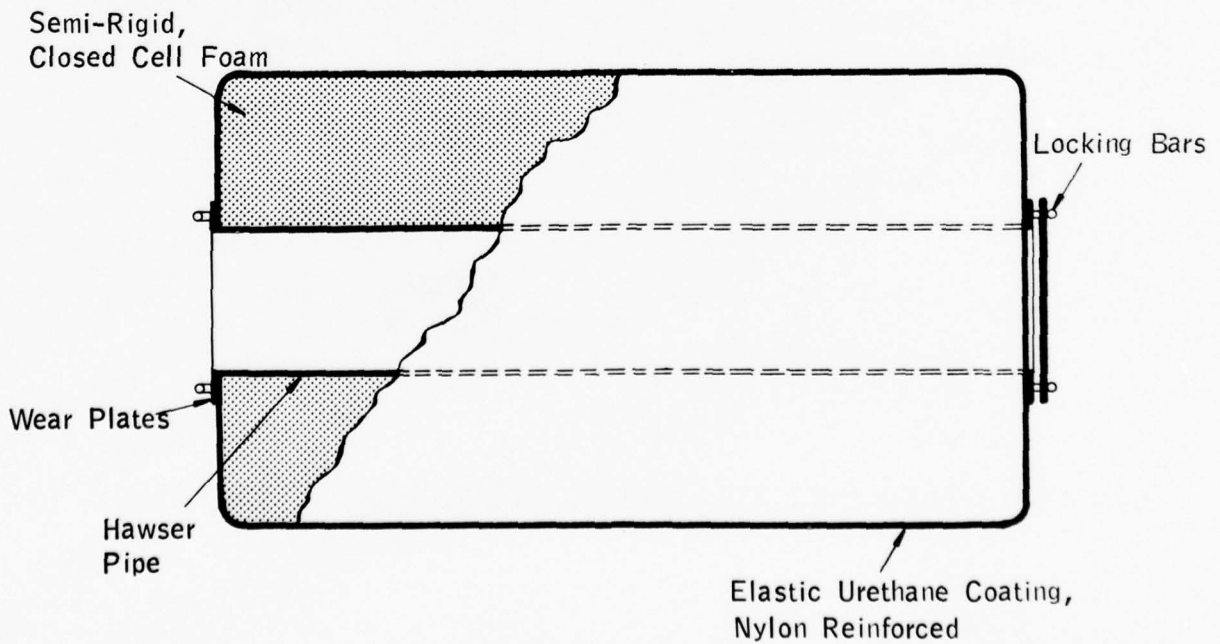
EXAMPLES OF CHAIN SUPPORT BUOYS
